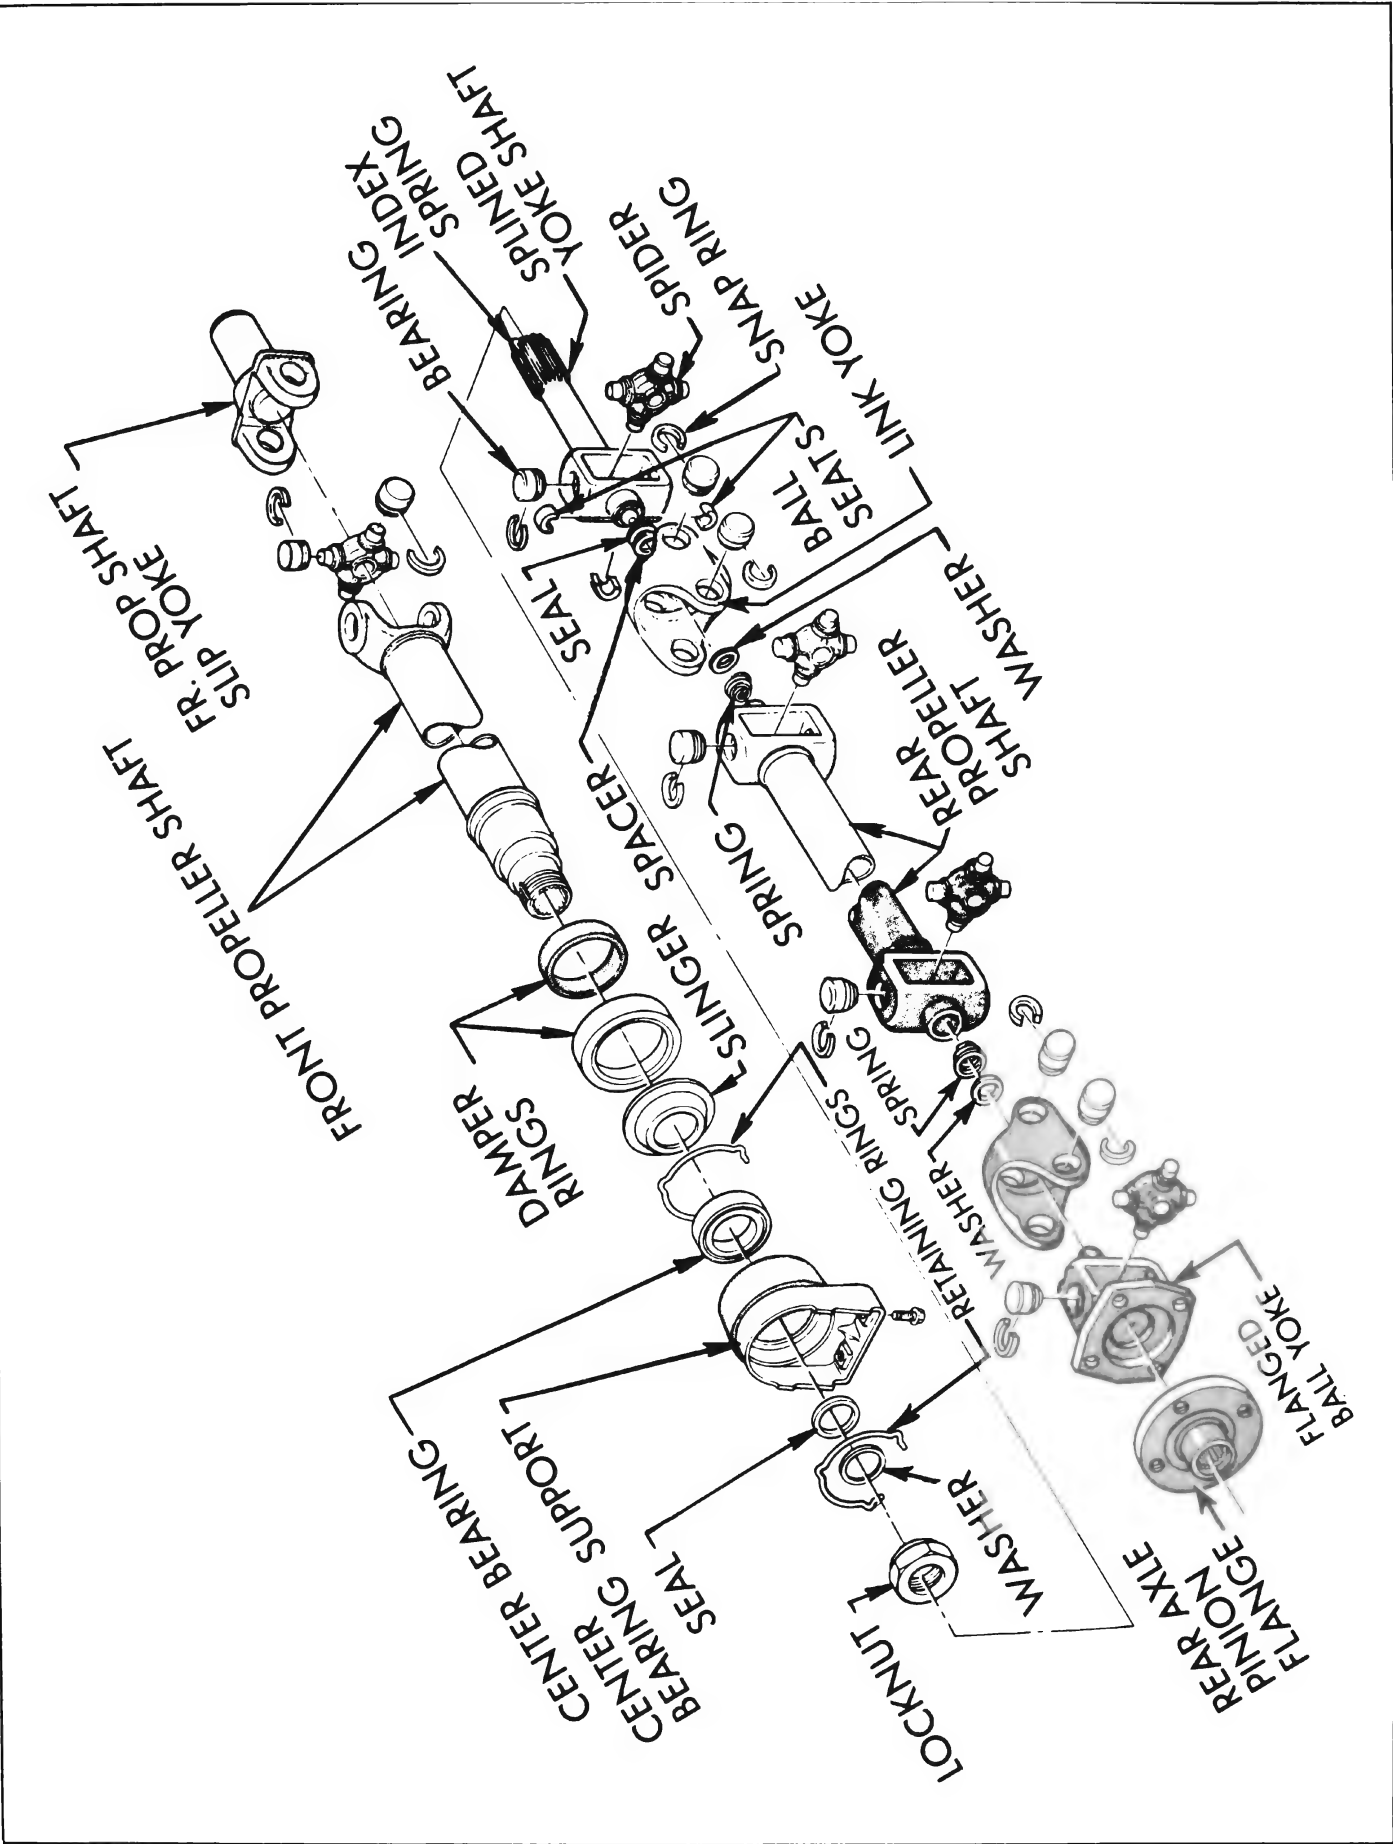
Exploded View—Propeller Shaft—4700 Series
